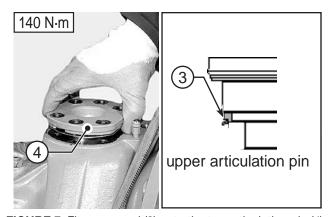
Fit a new seal (3) onto the top articulation pin (4). Lubricate and install the unit in the steering case. Position the screws (8) and tighten to 140 N·m. Check the correct assembly side of the seal (3).
